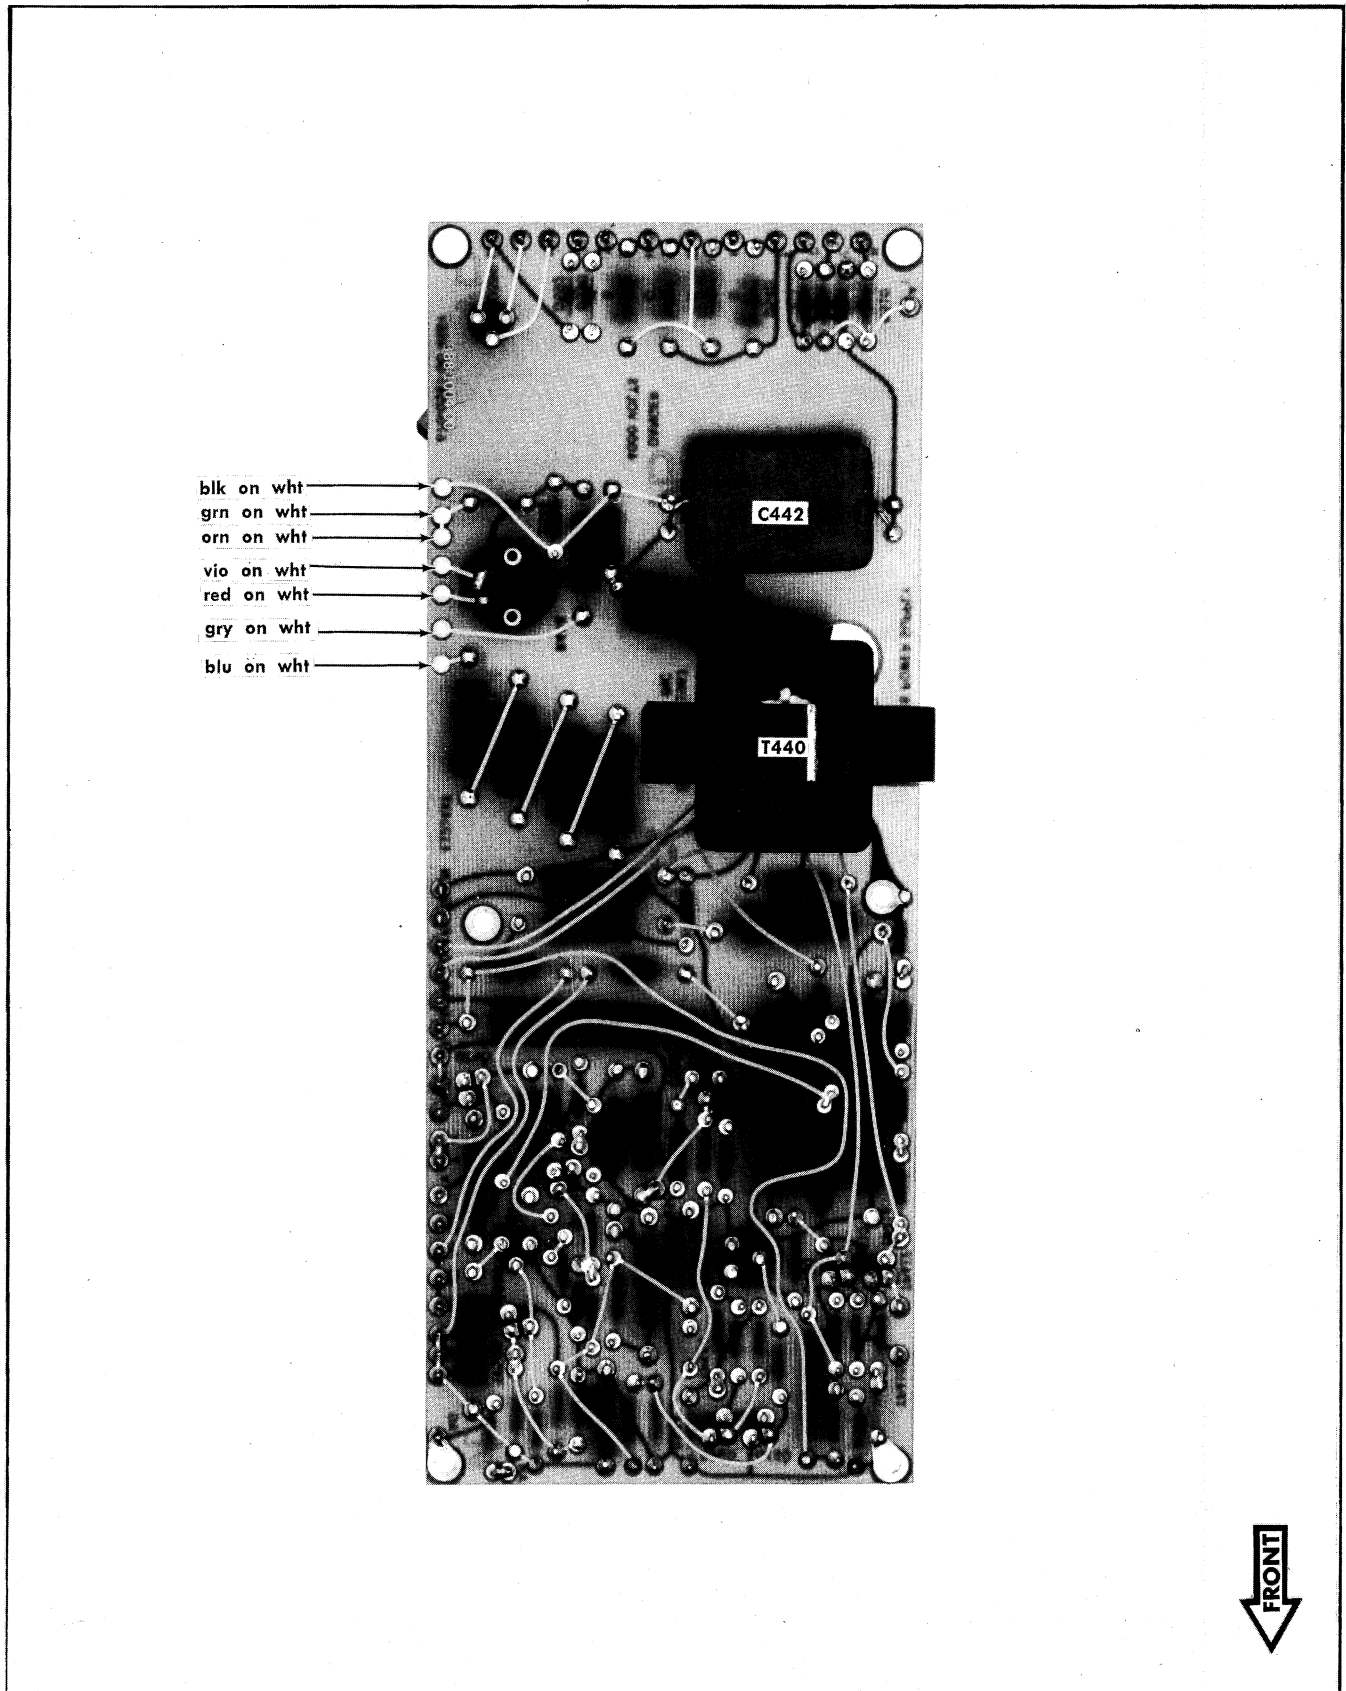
Bottom view of Power board showing components and wire color codes.
